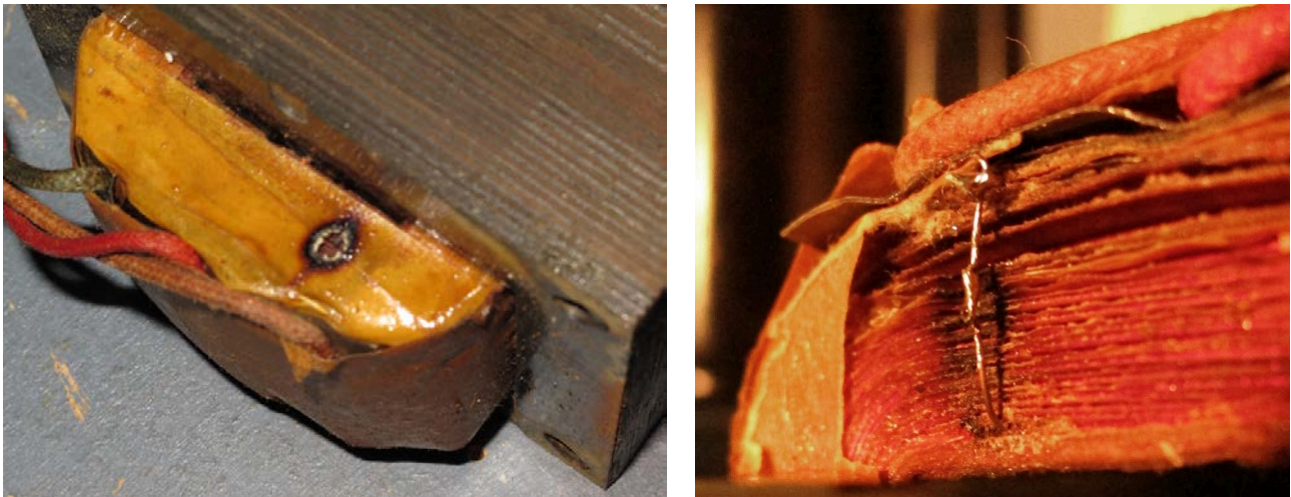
A dropped amplifier caused this OT to bend its mounting bolts and short a primary plate wire to chassis – no internal wiring damage, so it's back in the amp and working now.
